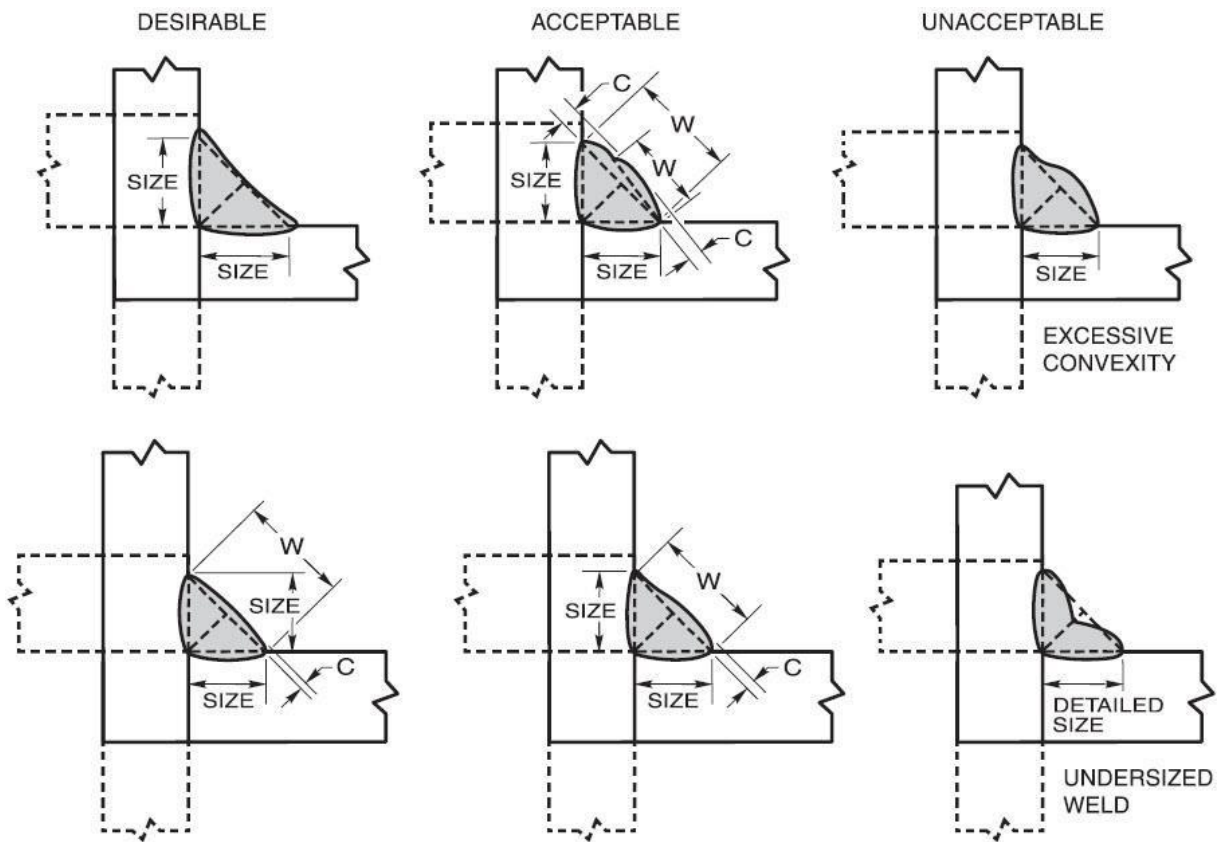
FIGURE B – FILLET WELD PROFILE REQUIREMENTS FOR INSIDE CORNER JOINTS, LAP JOINTS, AND T-JOINTS
